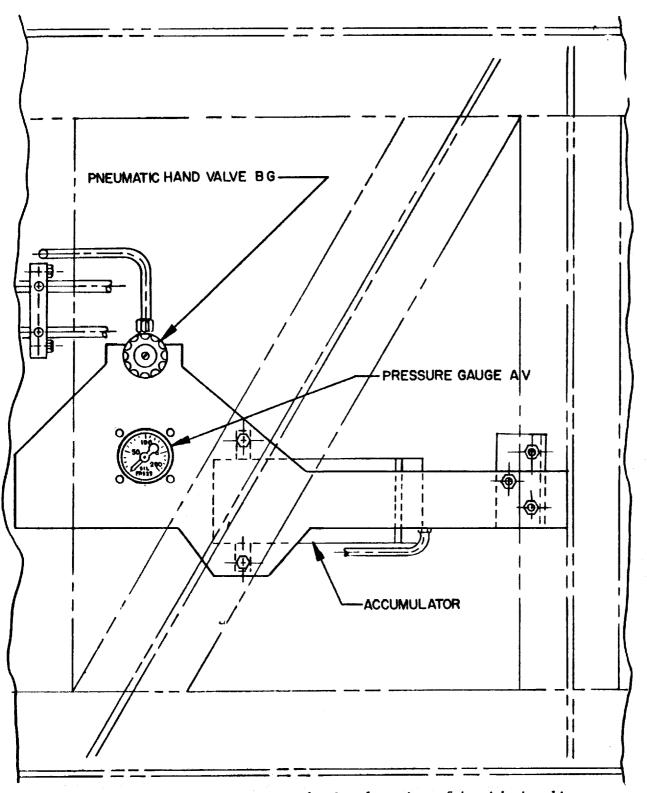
Tail Service Mast arm showing location of hood hydraulic system pressure gauge and hand valve.
